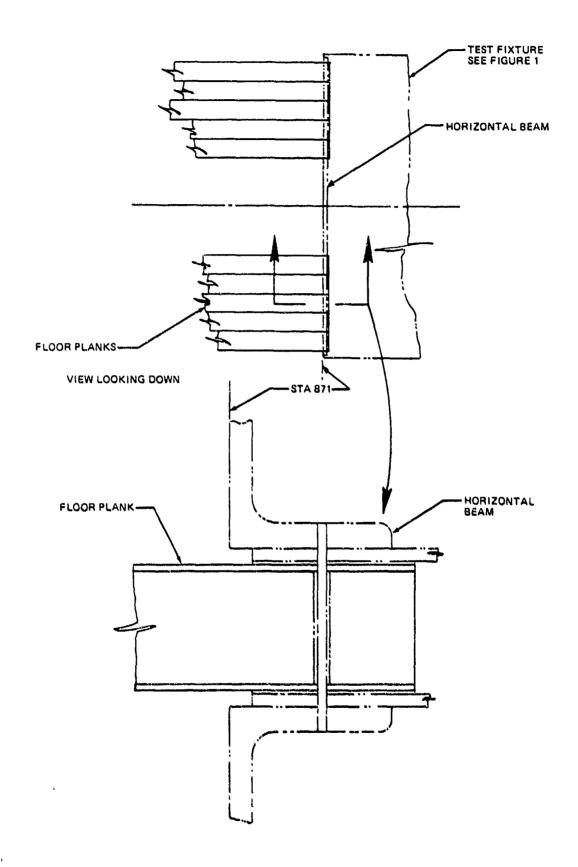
FLOOR BEAM TO AFT TEST FIXTURE ATTACH
